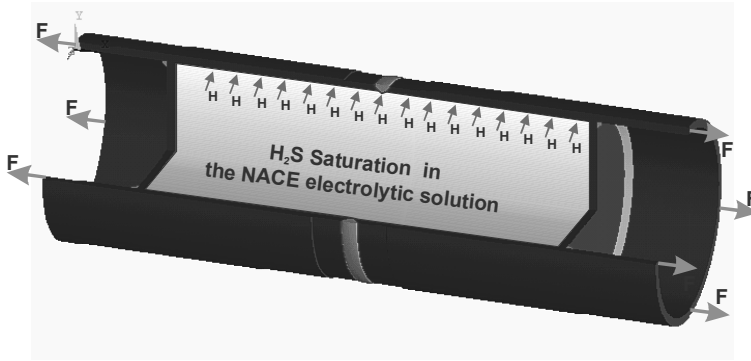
Schematic illustration of boundary conditions for testing hydrogen assisted stress corrosion cracking in the orbitally welded pipeline.
